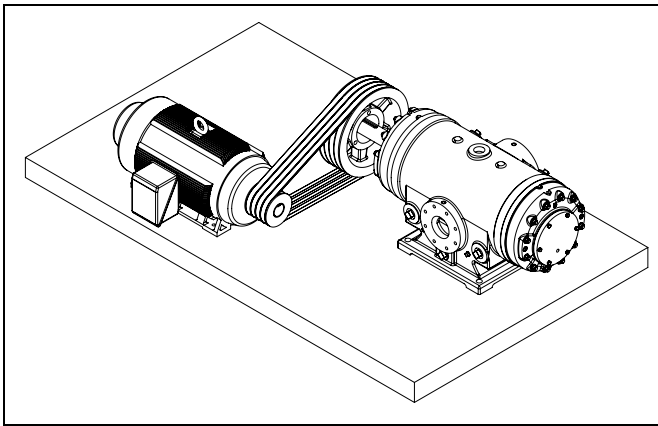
illustrates a typical jackshaft arrangement, which eliminates excessive belt load on the compressor. Alignment between compressor and jackshaft is checked in the same manner as with direct drive units.
